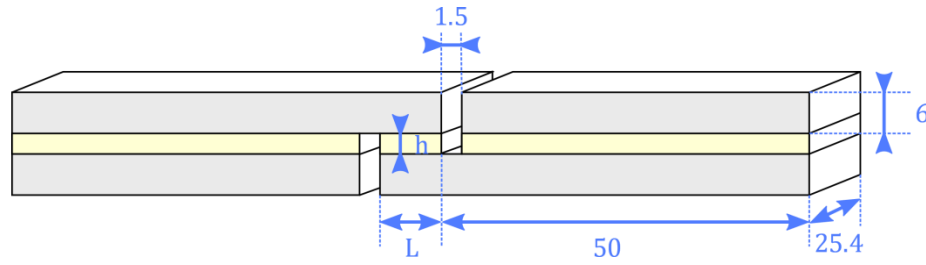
Thick Adherent Shear Test (TAST) geometry. Dimensions are given in millimeters.
